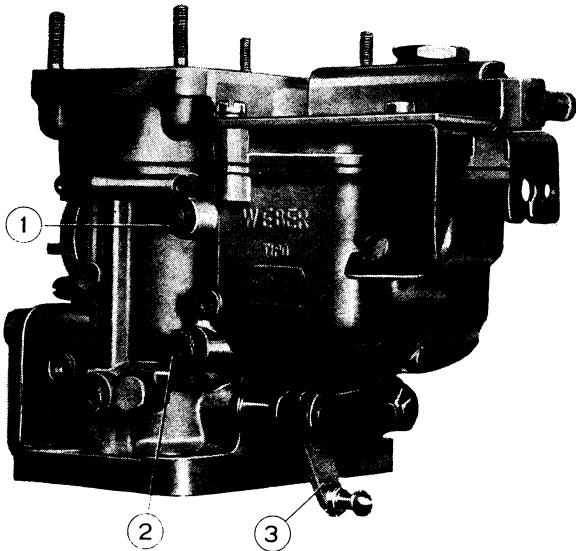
Rear Weber 34 DCS 4 carburetor to suit engine 118 B.000.
